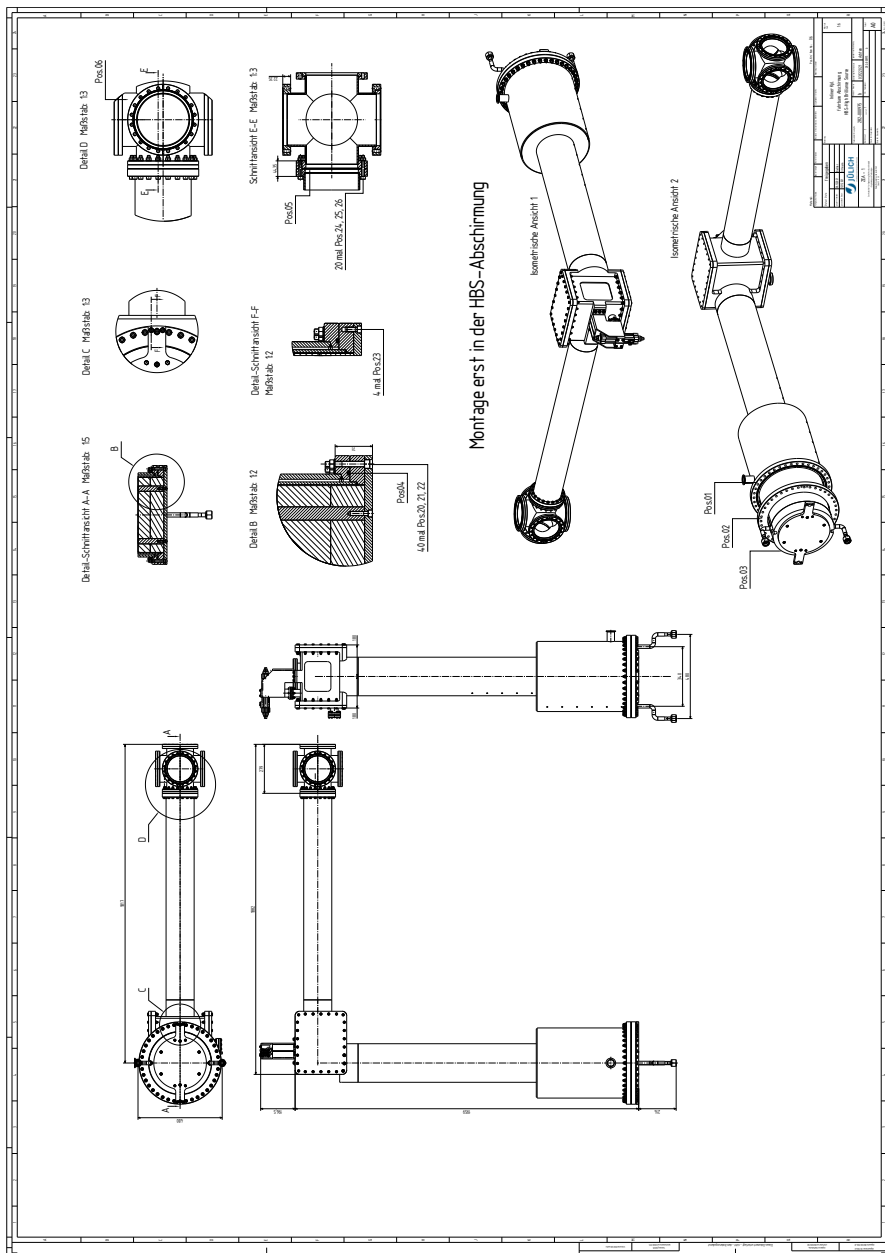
Technical drawing: overall view and detailed views of the L-tube from the HBS target station prototype
